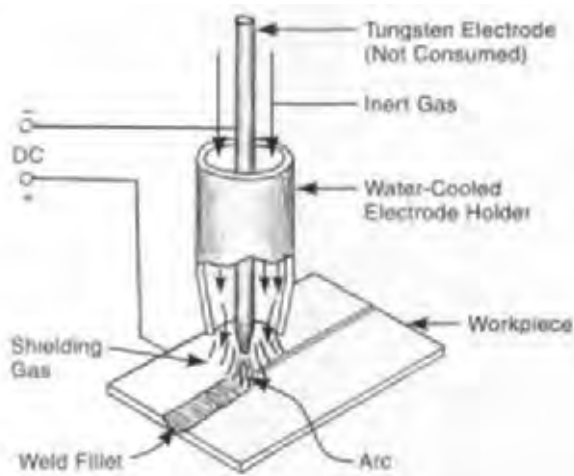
C1e Gas tungsten arc welding (GTAW). (Water cooling of the electrode holder is not shown.)
